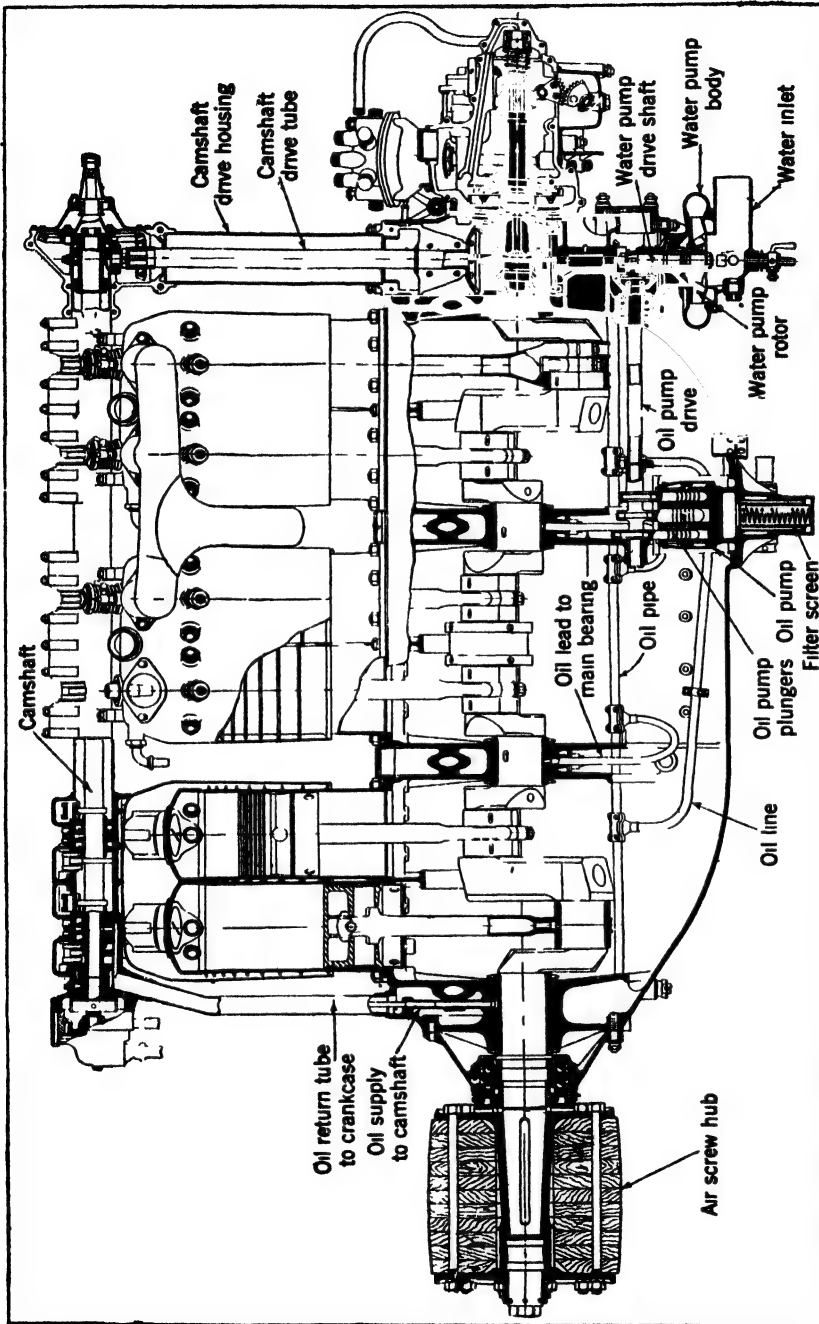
Longitudinal Sectional View of Crankcase of the Lorraine Aviation Engine, Showing Location of Triple Plunger Oil Pump, Method of Drive by Eccentrics on Shaft and Also Oil Leads from Pump to Main Bearings. This View Also Shows Location and Method of Drive of the Water Pump.
